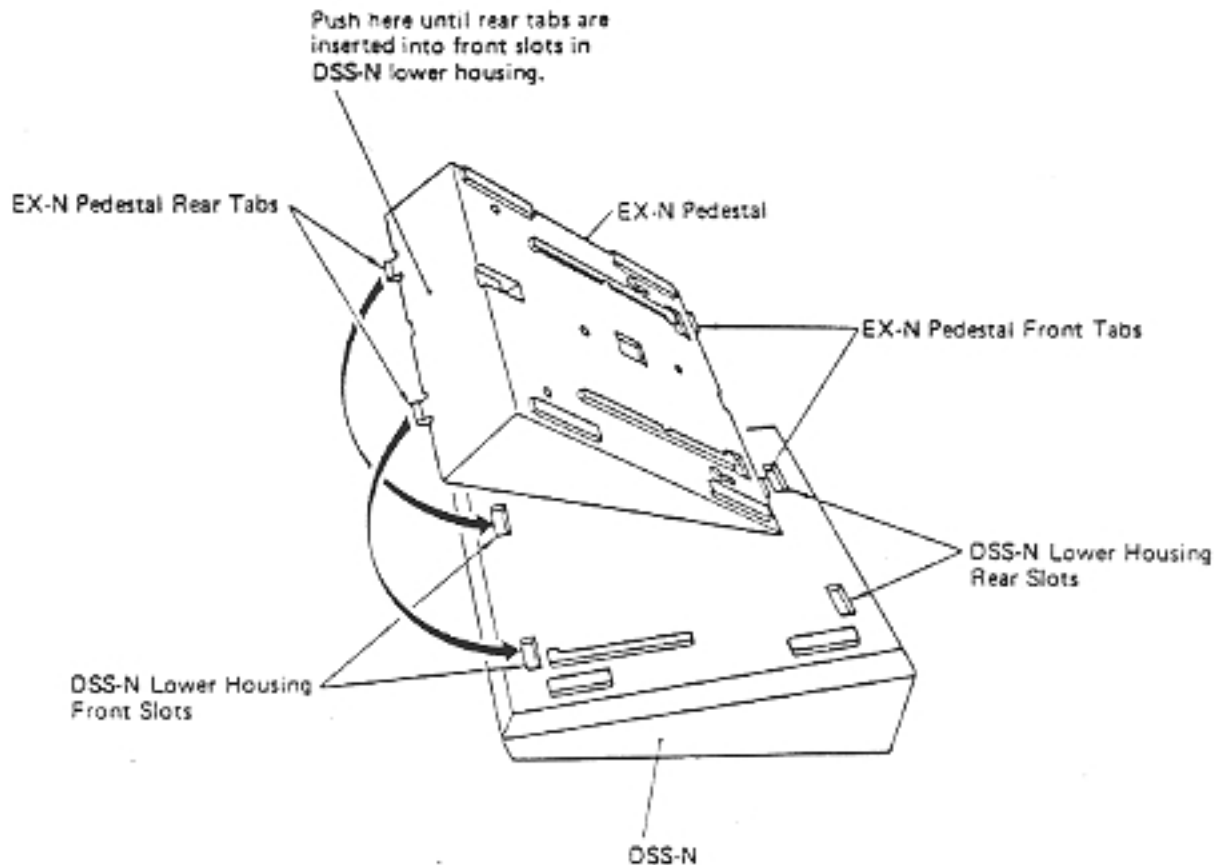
(1)(b)(ii) Mounting EX-N Pedestal on DSS-N Lower Housing
